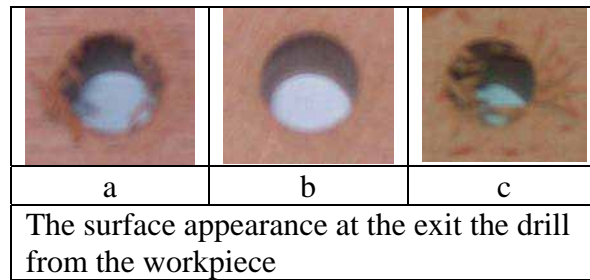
The surface appearance at the entry and exit of the drill from the workpiece (beech) cutted in tangential section (a), longitudinal (b) and radial (c) at the feed rate 250 mm/min and rotation speed 1371 rot/min.
